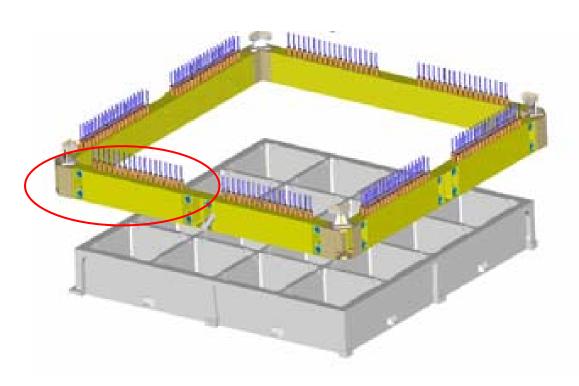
ACD Base Frame. The Electronics Chassis for the Calibration Unit will be one section of this assembly, shown in the red oval.
